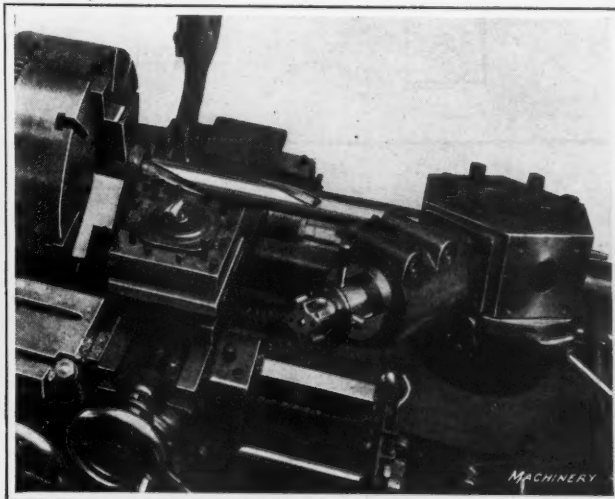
Machine set up for performing Operation on Part shown in Fig. 15
